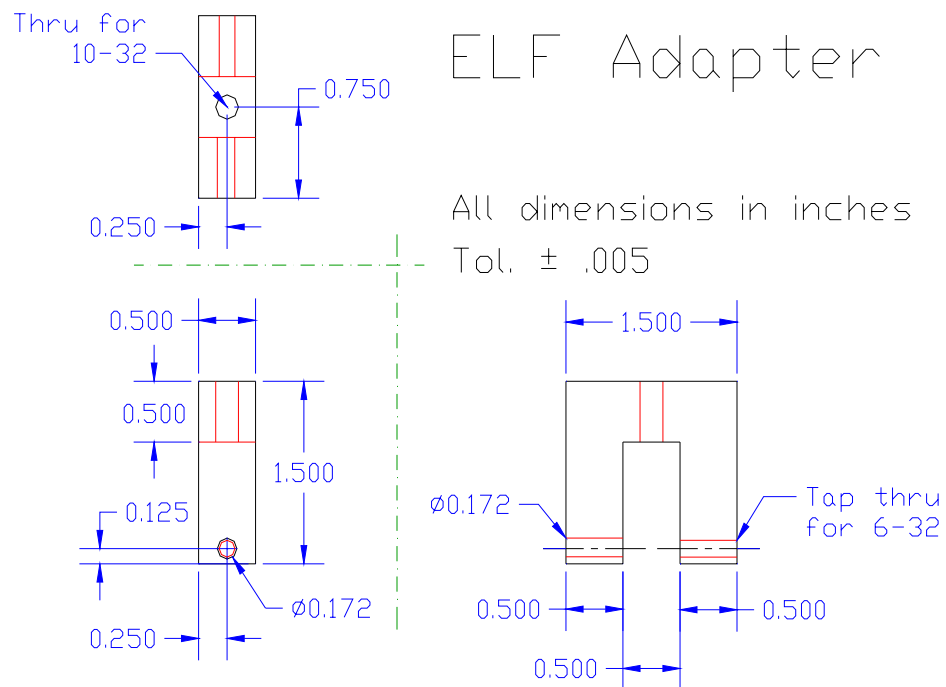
Tensile mechanical test adapter to interface hydrogel constructs with the EnduraTEC ELF 3200 testing frame.
